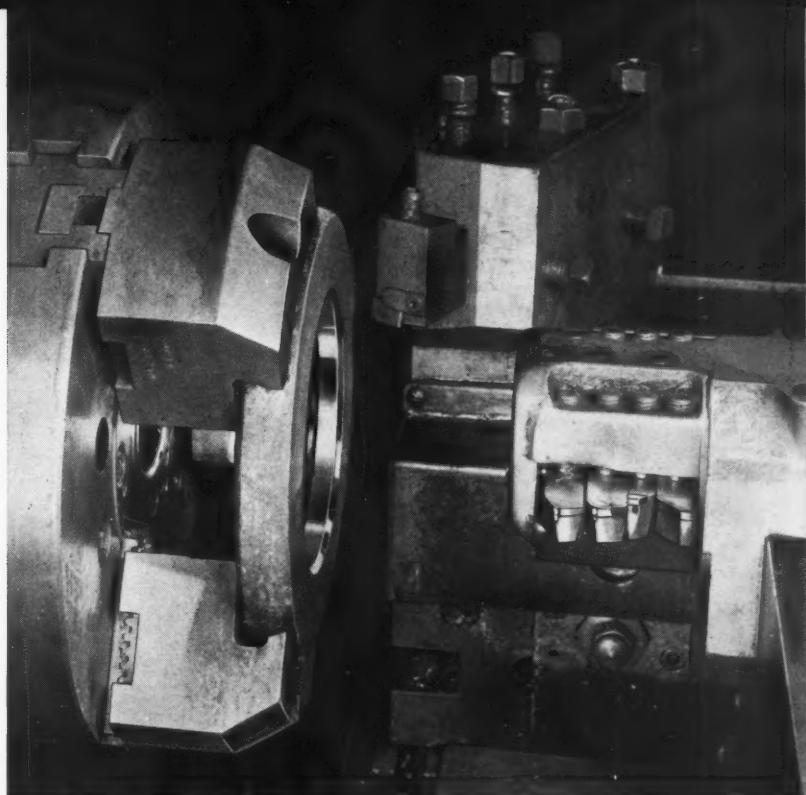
In the second operation performed on the forged driving gear, the periphery, beveled face, chamfer, and outside corners are machined
